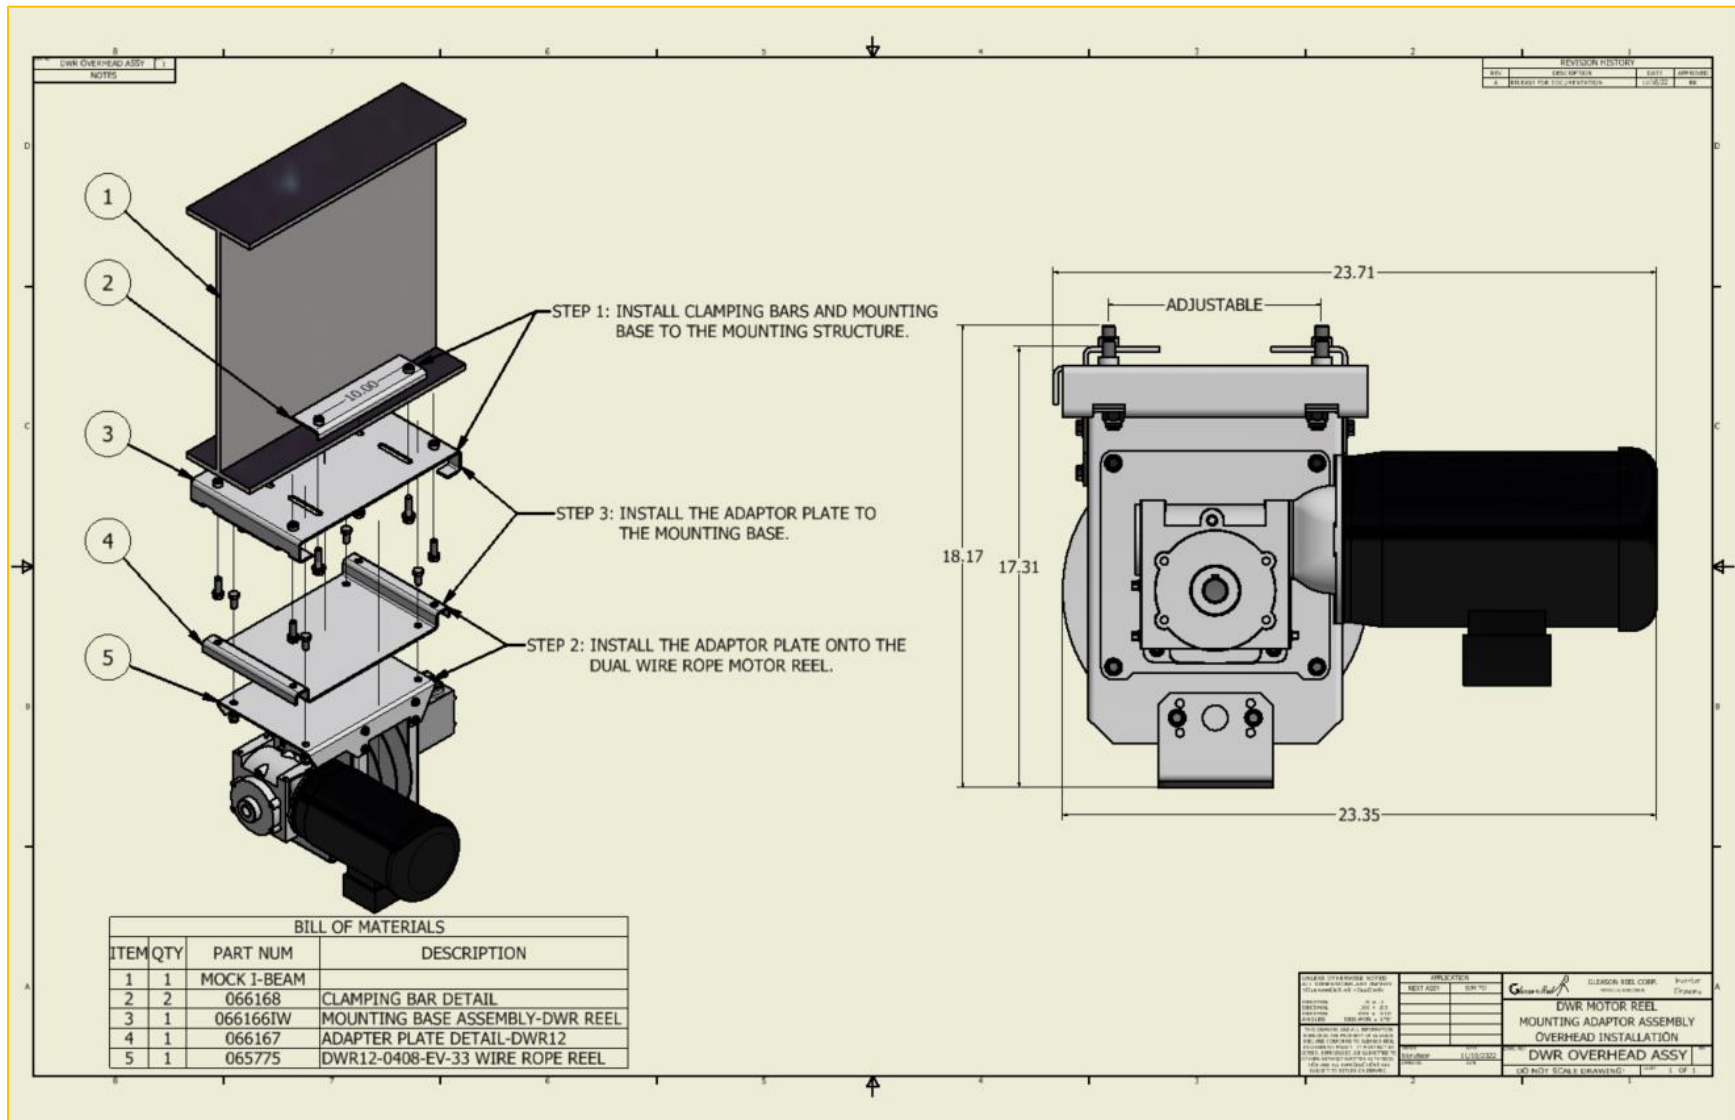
Overhead Mounting with Mounting Adaptor Assembly
